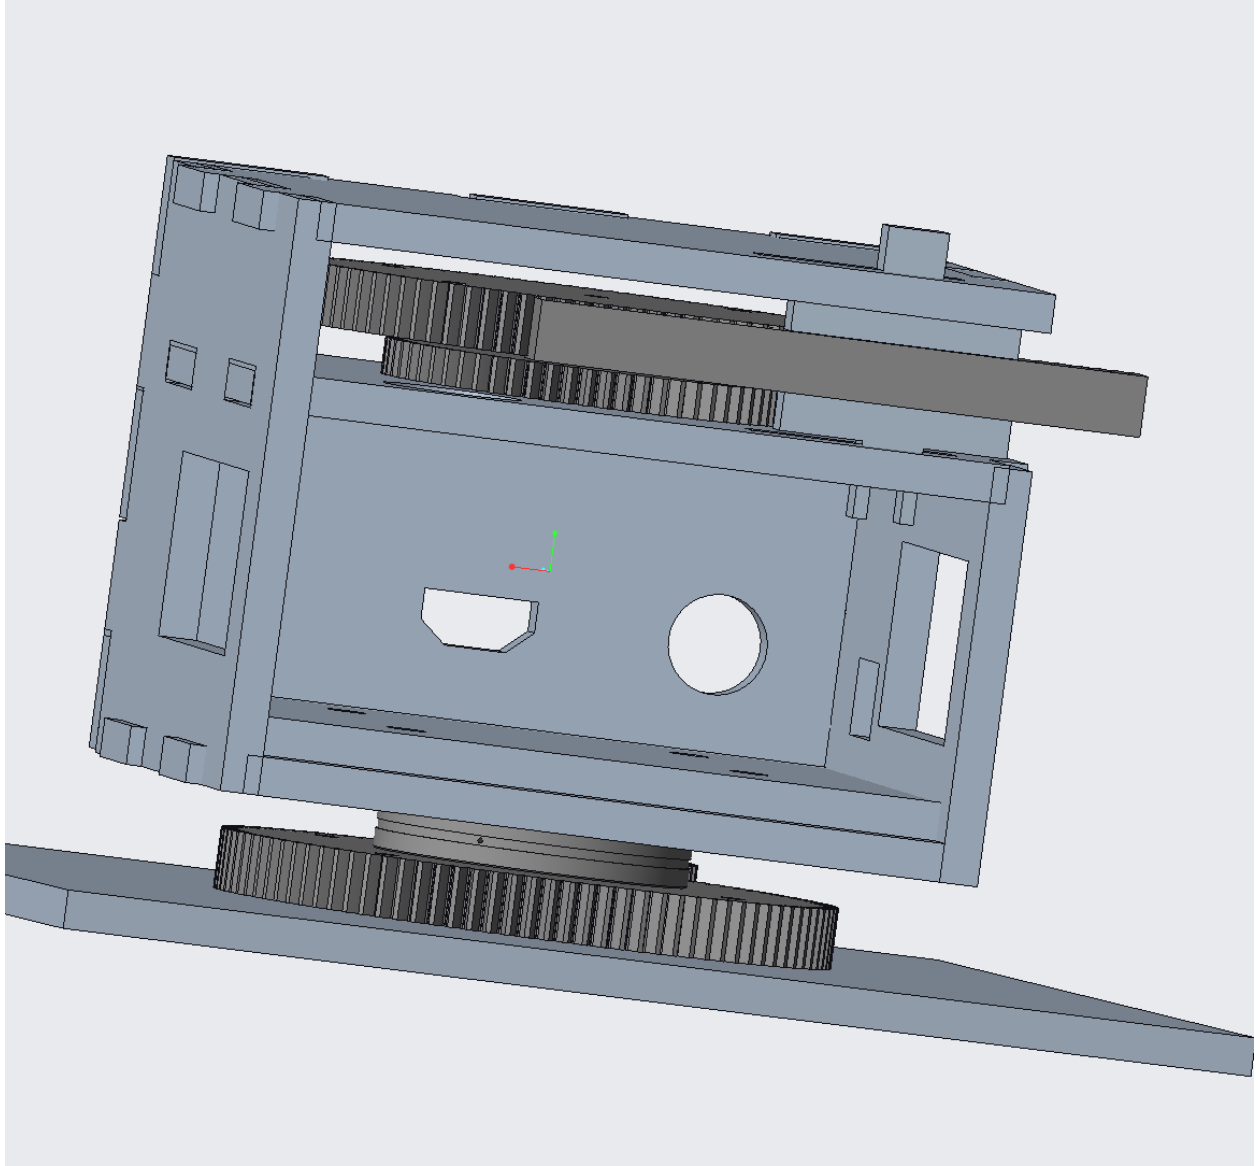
Rack and pinion gear mechanism along with slider attachments for focus toggling.
